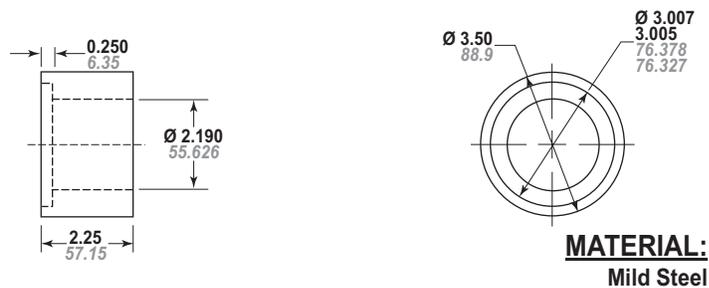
Model 6000 Sleeve Pressing Ring (Use with Bearing Pressing Tool)
